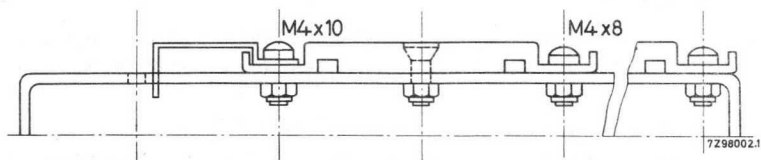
Short-Board Version; position of rear profile strips on side plates (Step 5)
